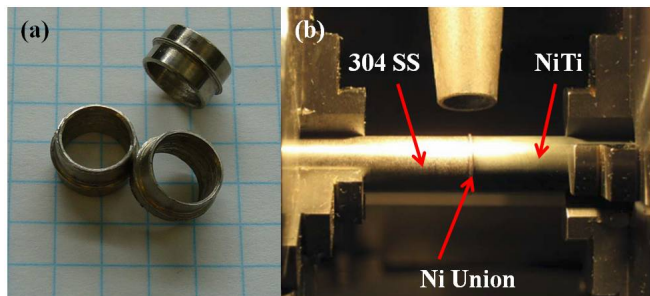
(a) Ni UNIONS USED FOR FILLER METAL IN THIN-WALLED NiTi/304 SS LASER WELDS; (b) ASSEMBLED THIN-WALLED SAMPLE PRIOR TO WELDING.
